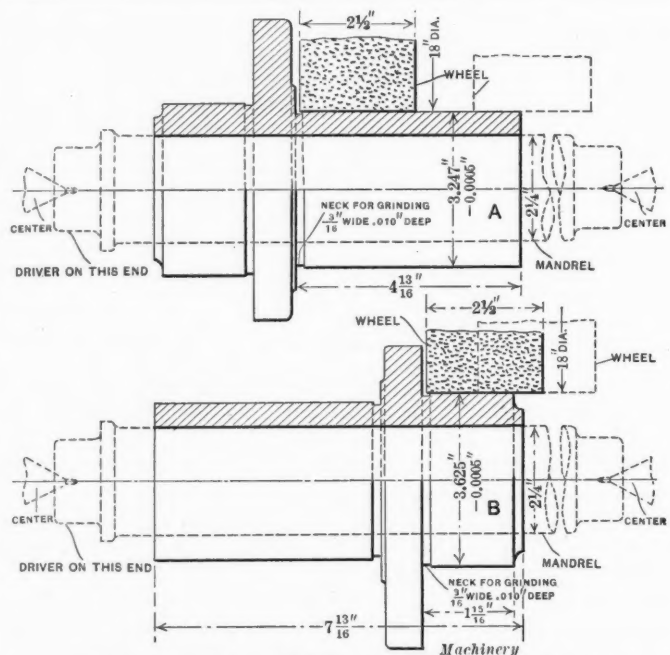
Example of grinding a Cast-iron Gear Box Bracket by "Fixed-wheel" Method
